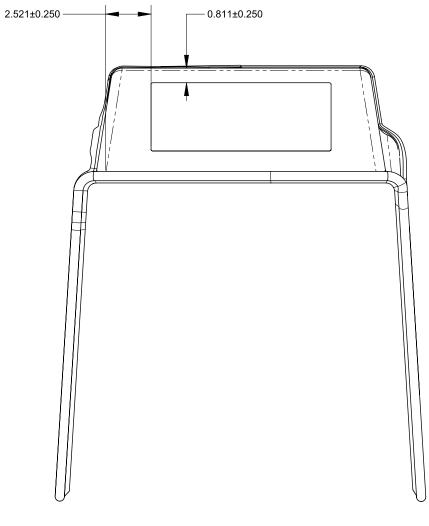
Chevy Cowling Assembly (Unmodified) 601-020-008
